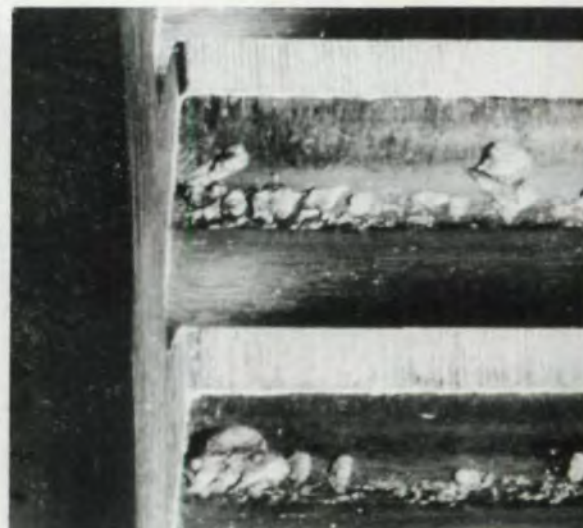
Pitting failure caused by misalignment under load.
